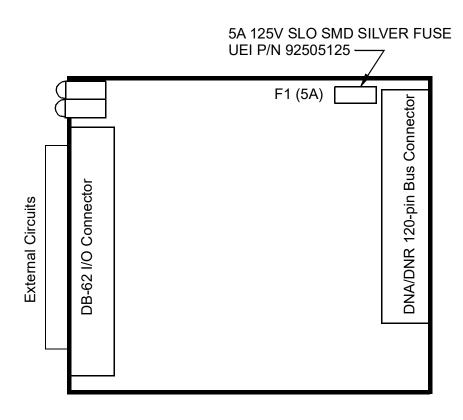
Location of Fuse for Base Boards Equipped with a Fuse
